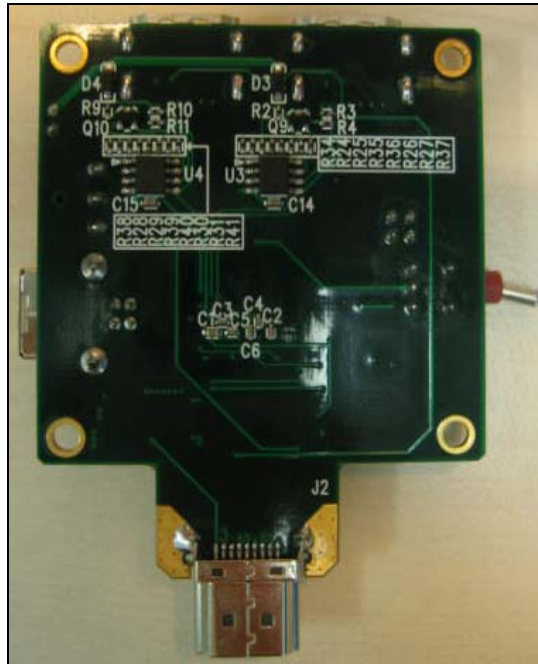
Bottom View of PI3HDMI1210 Demo Board
